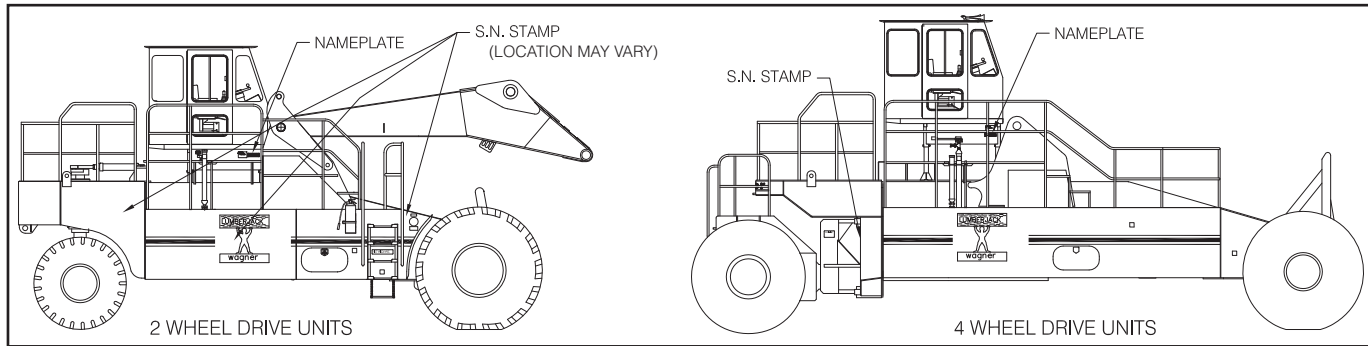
Machine Identification (Carriage Assembly Shown Removed for Clarity)
